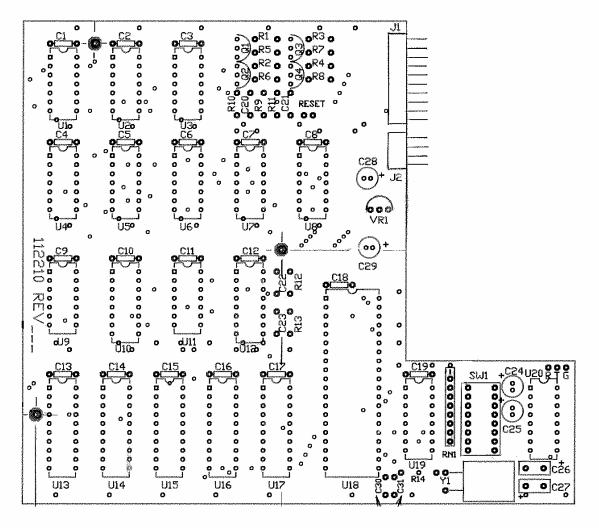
RS232C Interface Board Component Layout (112210, Rev. 2)
